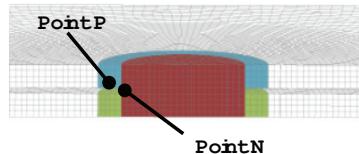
Rupture initiation points of nugget pullout and nugget fracture
